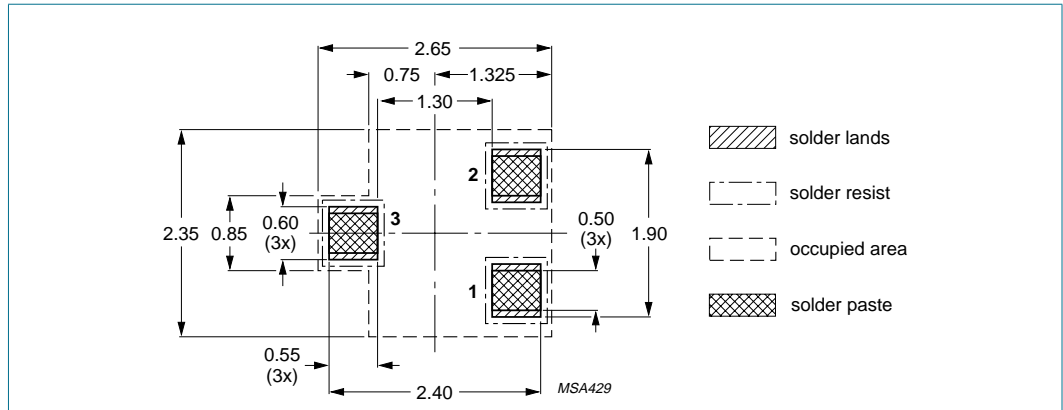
Reflow soldering footprint SOT23 (TO-236AB)
